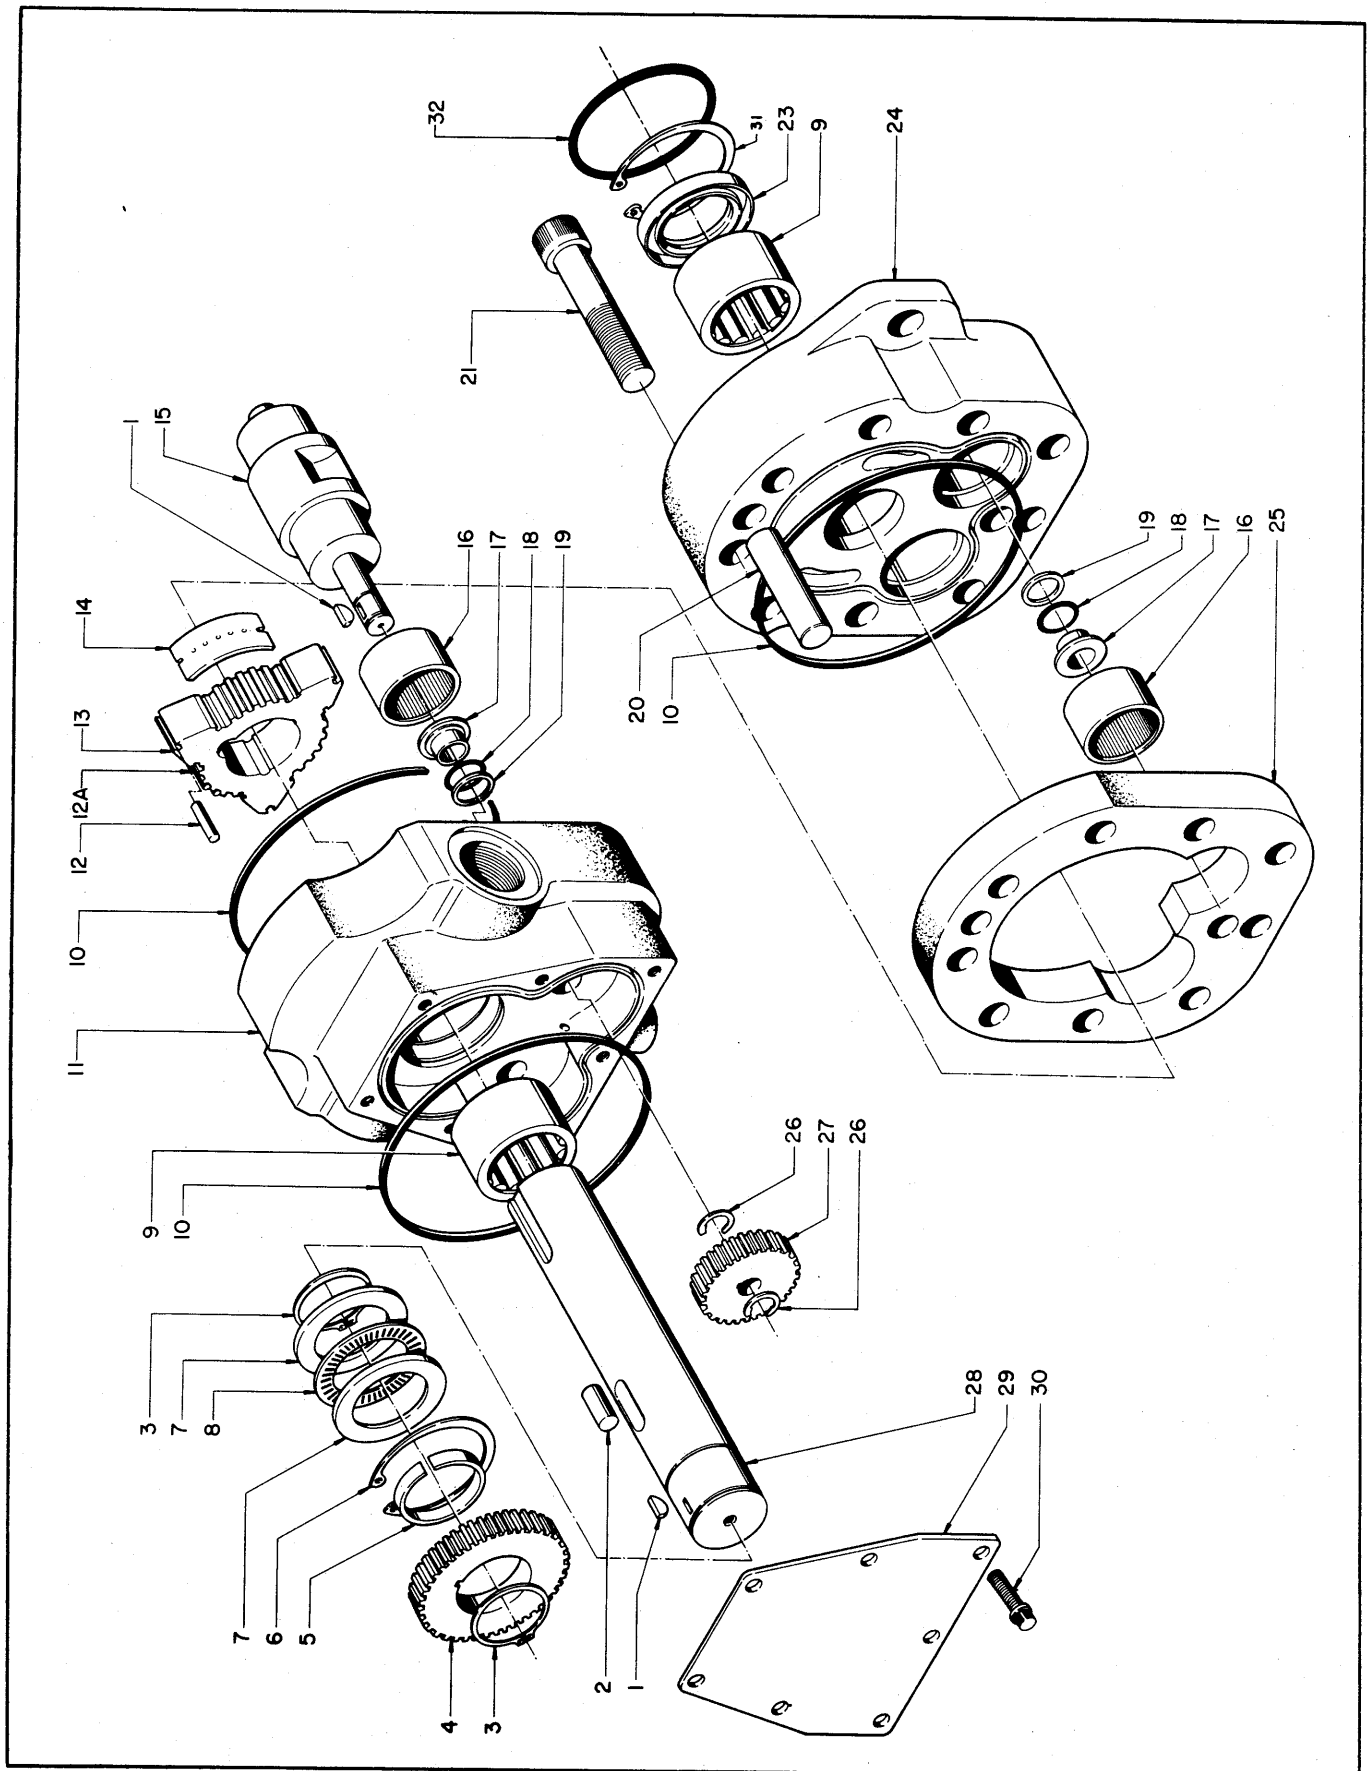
ROL-SEAL MOTOR EXPLODED VIEW
